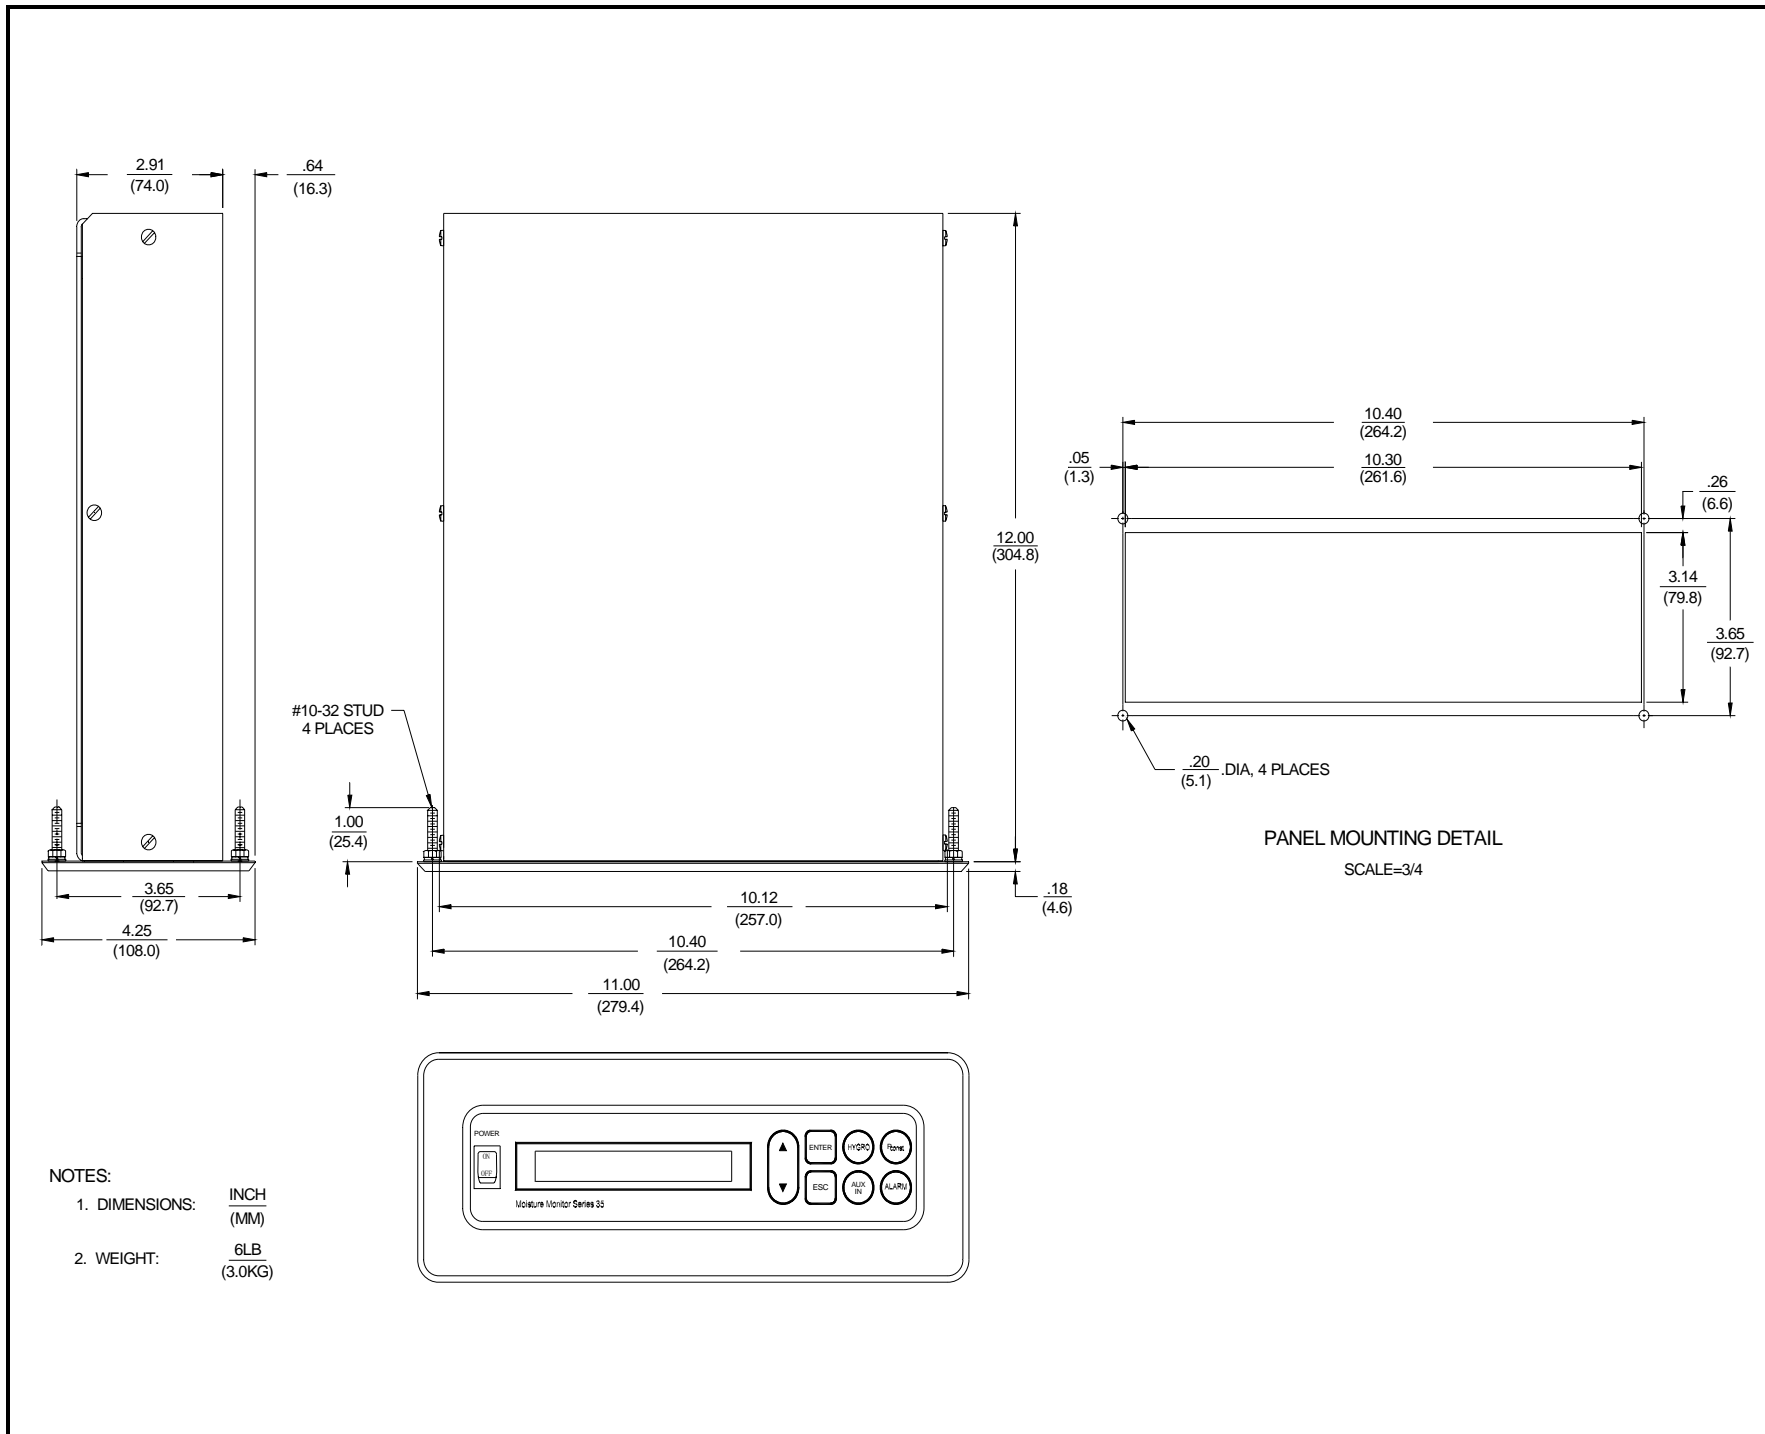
Rack Mount Dimensions (ref. dwg #712-930)
